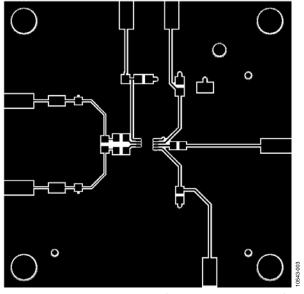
ADA4830-1BCP-EBZ Board Layout Pattern, Primary Side
